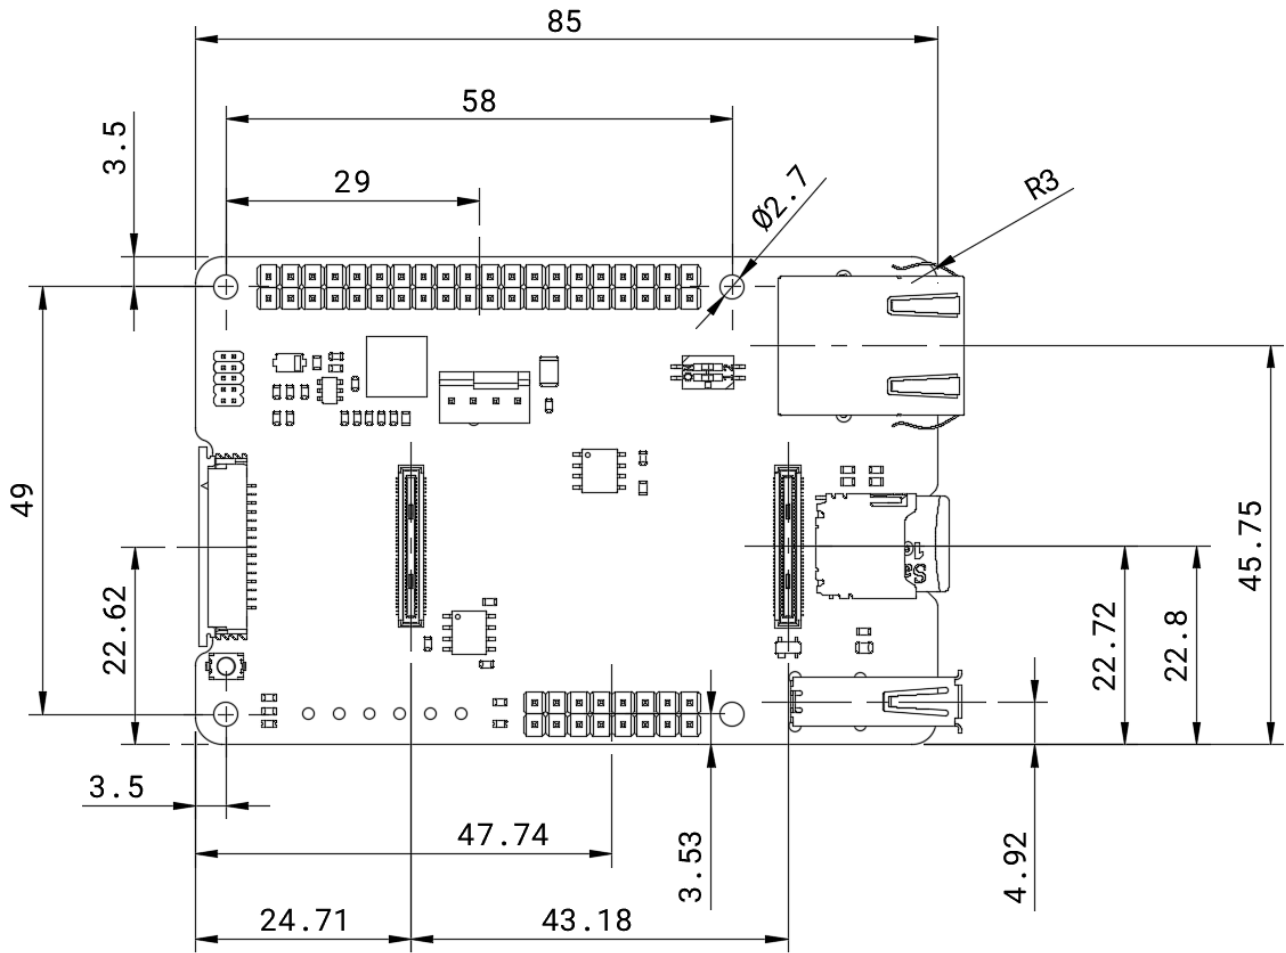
Portenta Hat Carrier board dimensions (in mm)
